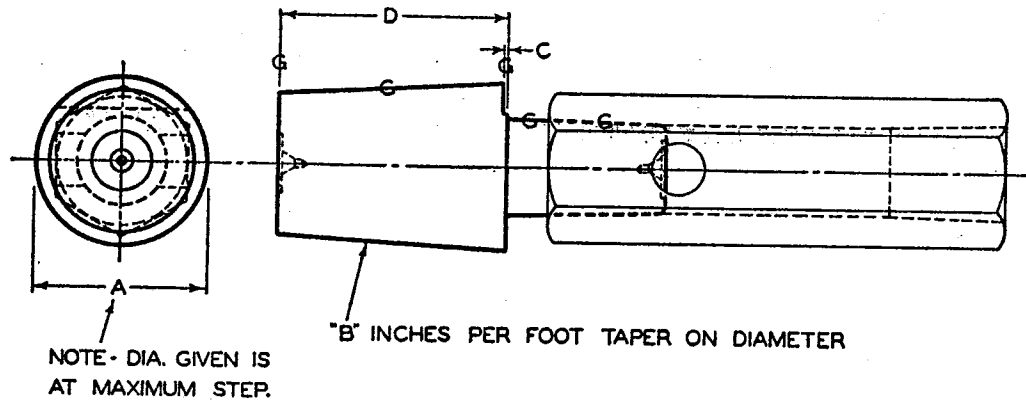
Recommended design of taper plug gage and method of dimensioning.
